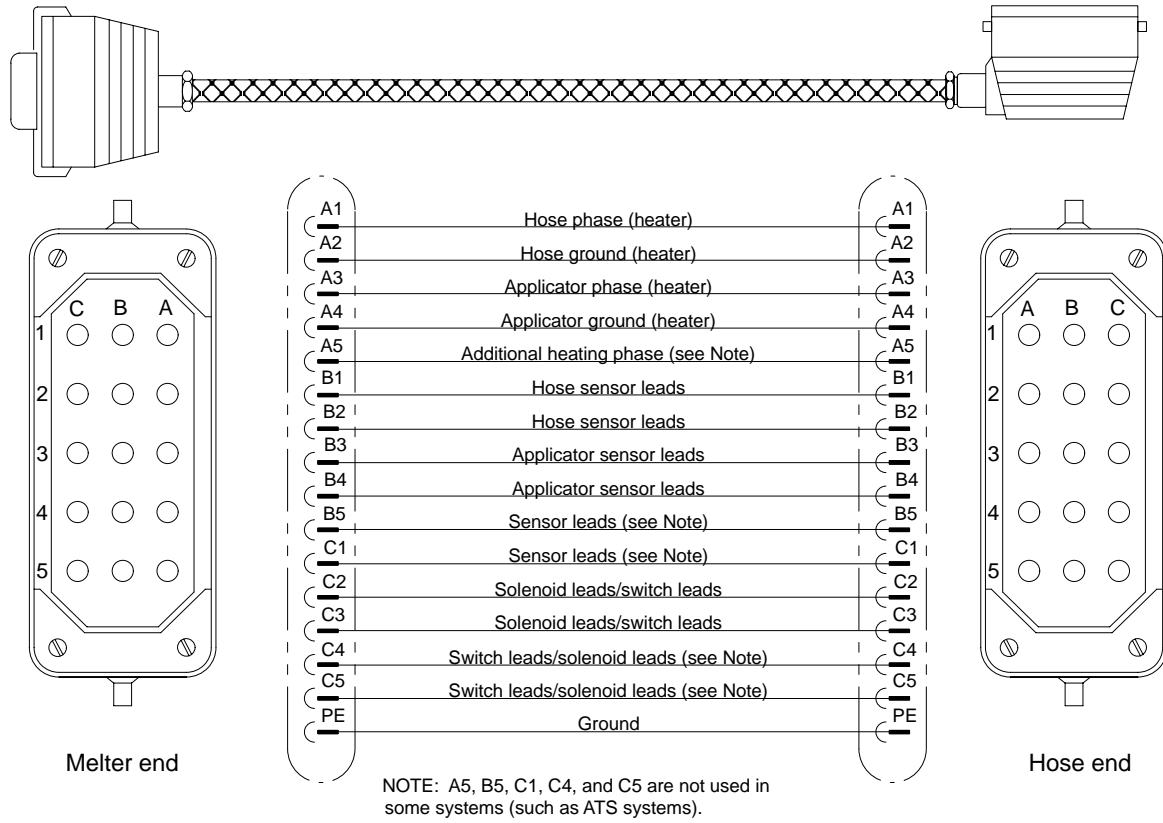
M-style adhesive manifold cordset extension cable wiring diagram
